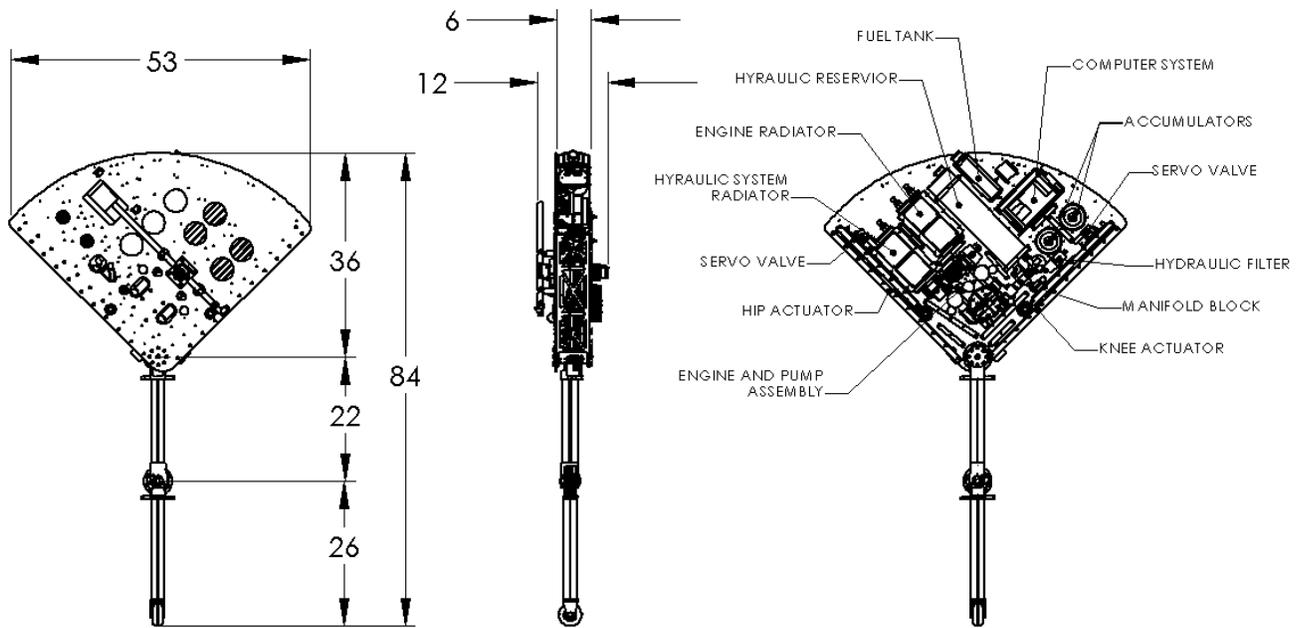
SolidWorks design drawings showing overall size of the Monopod and layout of major components. Units are in inches.
